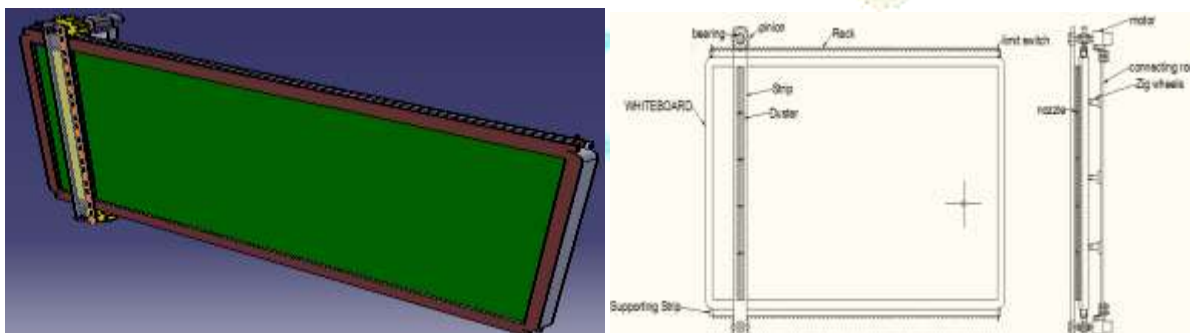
3D, Side and Front View of Automatic Board Cleaning System
